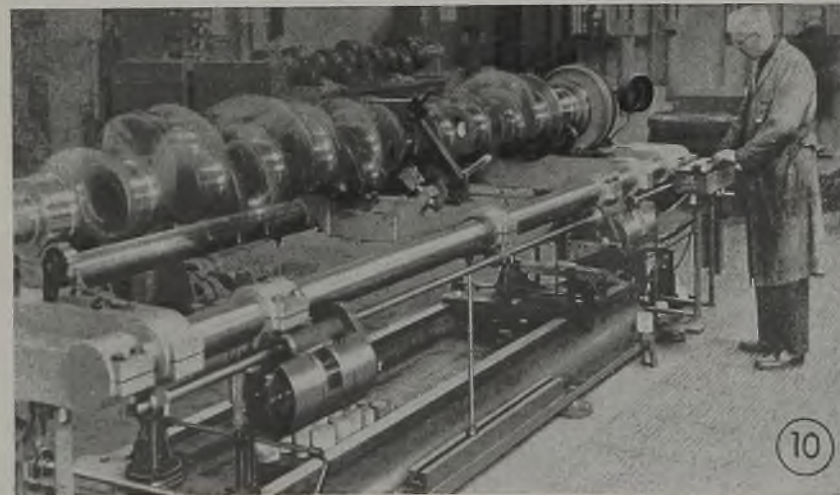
Double-compensator machine for dynamic balancing crankshafts
